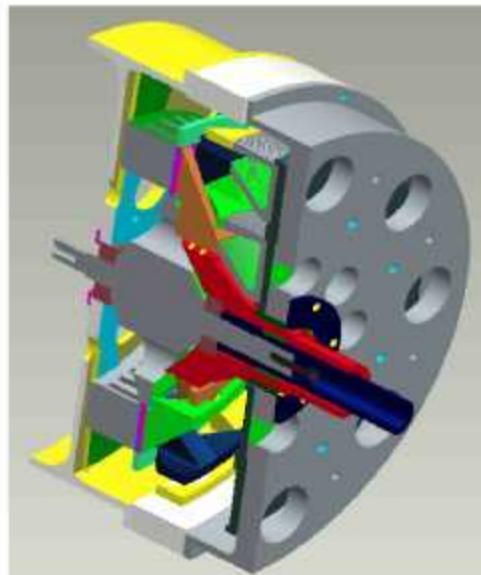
Cut view of the uncluttered rotor proof-of-concept prototype.
